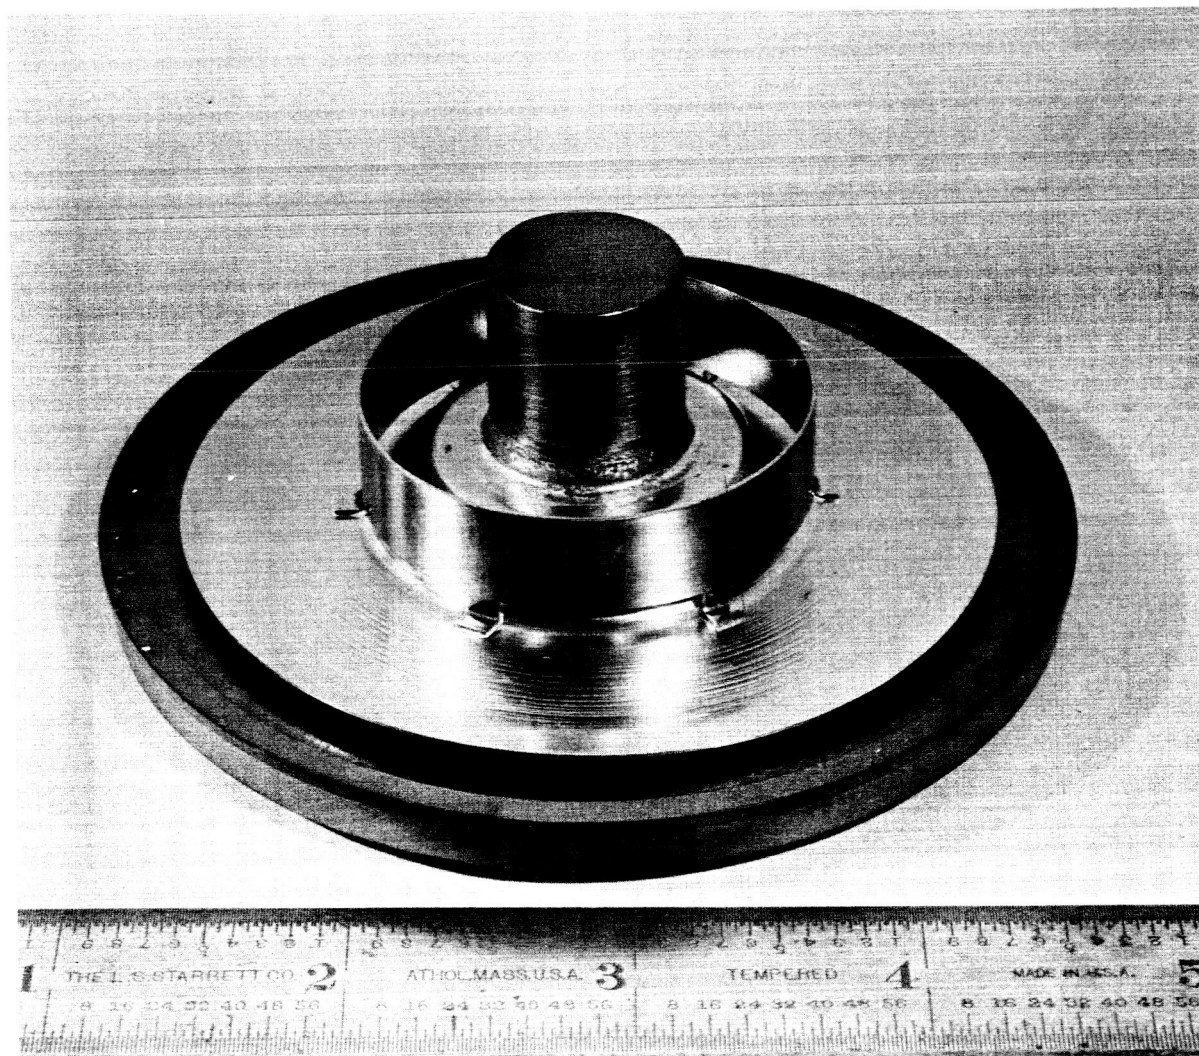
Upper Flange Sub-assembly for Vacuum Capsule Including Molybdenum Contact, Arc Shield, Rodar End Dish, and Amzirc Flange.
